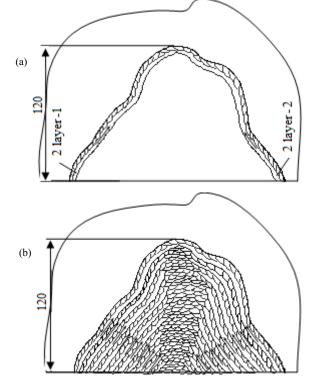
Deposition sequence of the second layer (a); and final appearance of the repair weld/surface weld (b).
